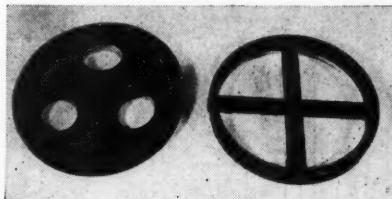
The old flywheel was replaced by welded design (right) which weighs 23% less, but is just as efficient.
